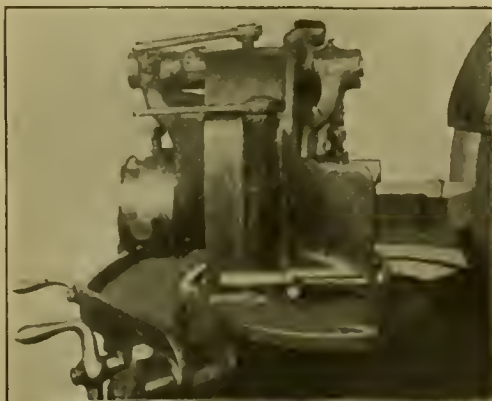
GRINDING THE LEFT SIDE FACE OF A LARGE V TOOL.
